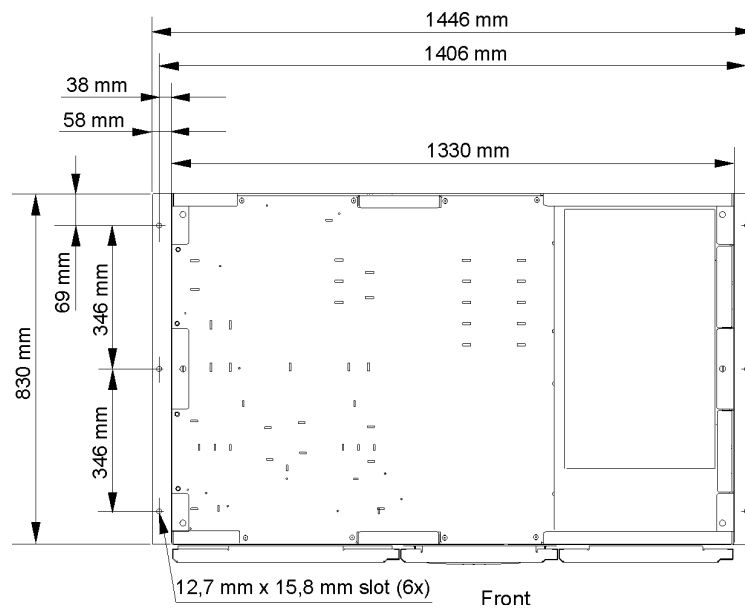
UPS Cabinet dimensions (bottom view with mounting brackets)
